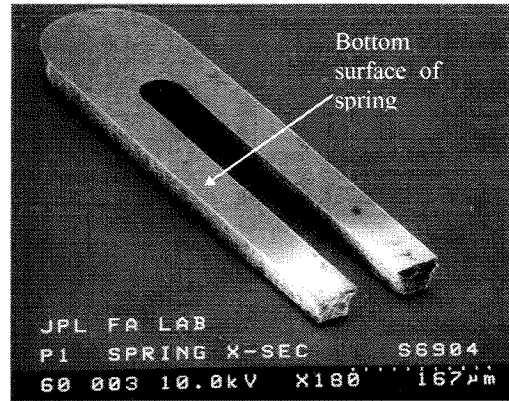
Part of spring detached from actuator and flipped bottom side up.
